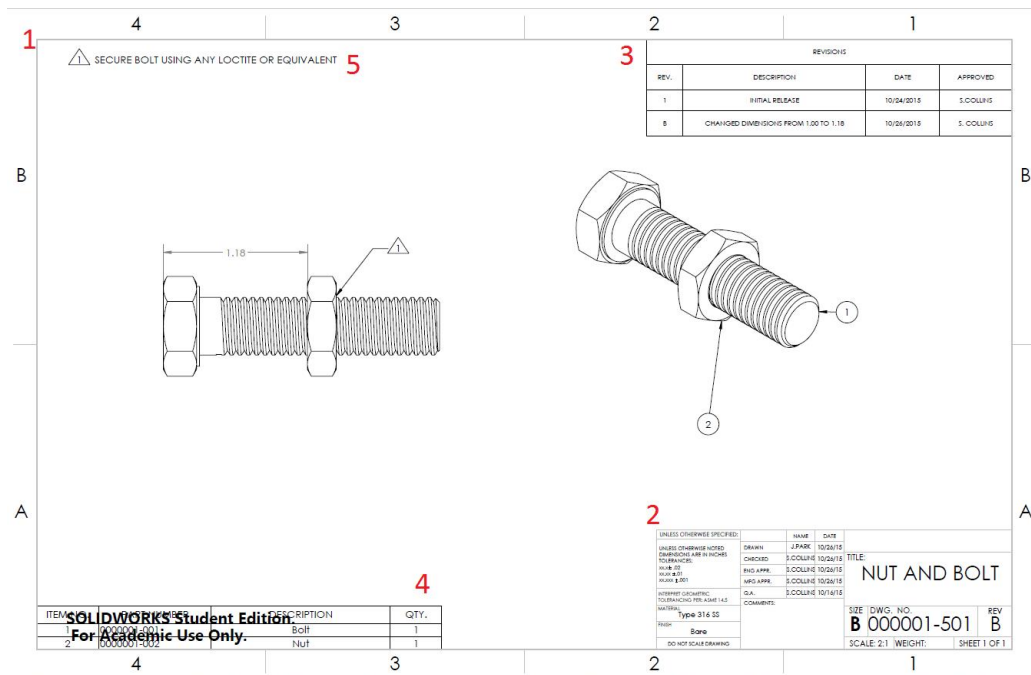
Primary elements of an engineering drawing. See Section 11.2.1 for an explanation of each.
